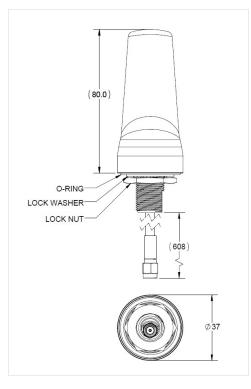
HCF69273XN MECHANICAL DRAWING
